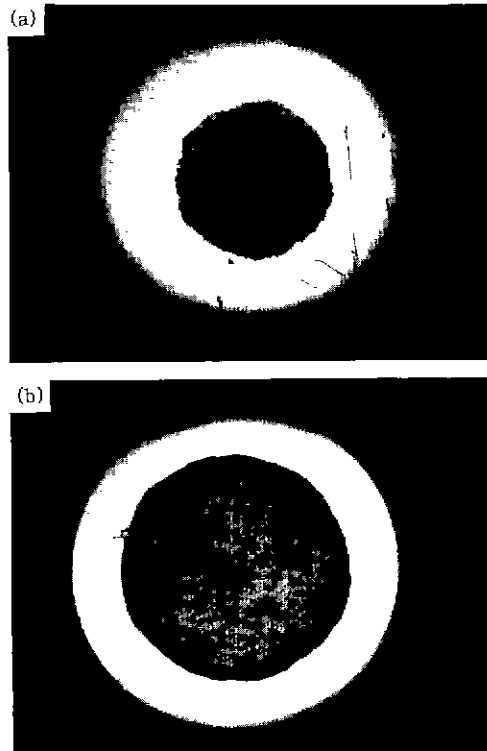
Cross sectional view of 1.5 mm diameter wire, fabricated by using different processing methods.
